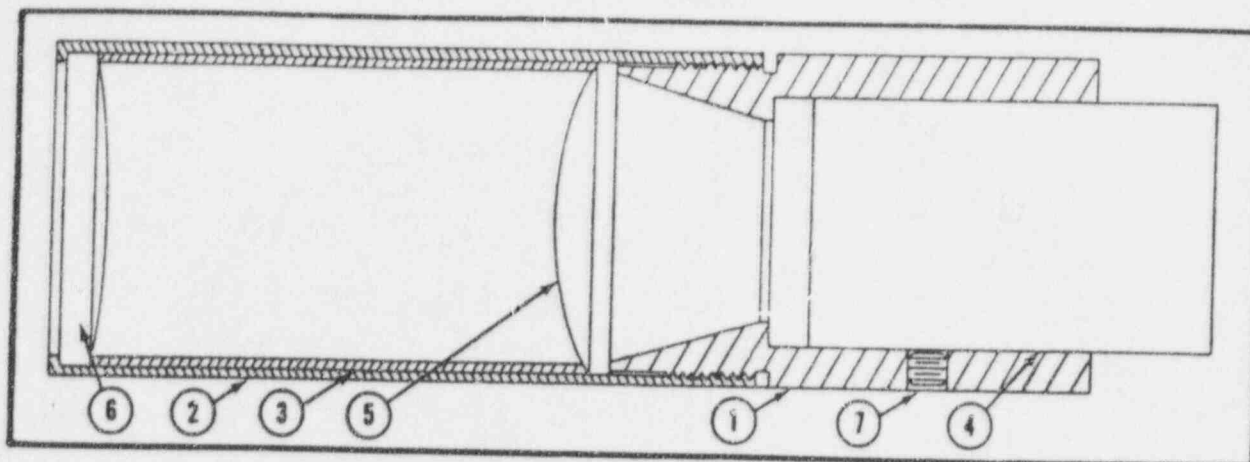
COBALT COLLIMATOR FIELD LENS ASSEMBLY
